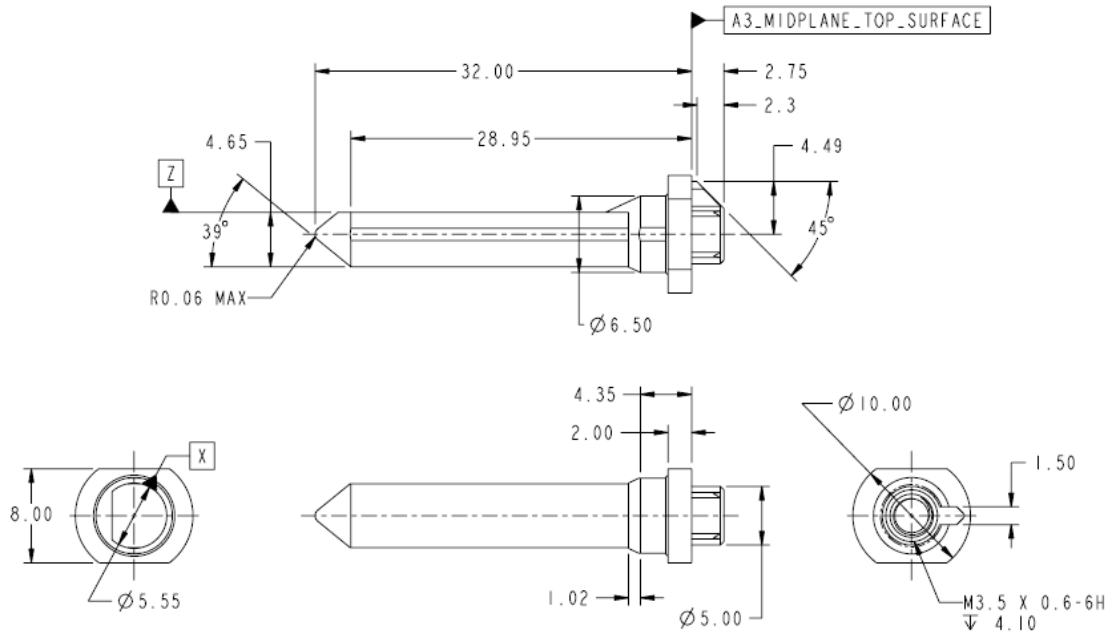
SBBMI Midplane Guide Pin Dimensions⁵
